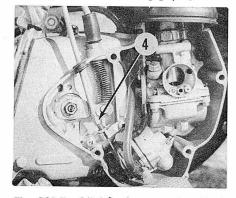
Oil injection control cable is adjusted at (4). Refer to text.
